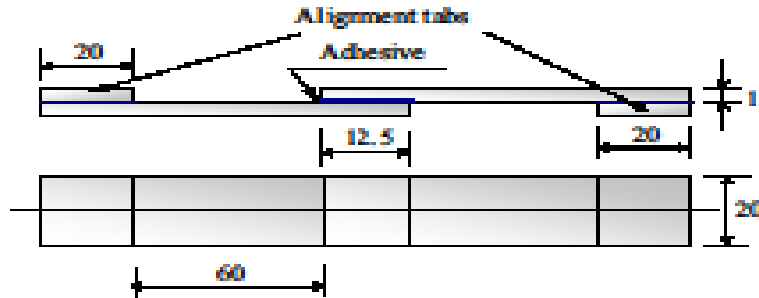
Specimen geometry with a 150 μ m adhesive thickness (dimension in millimeter)
